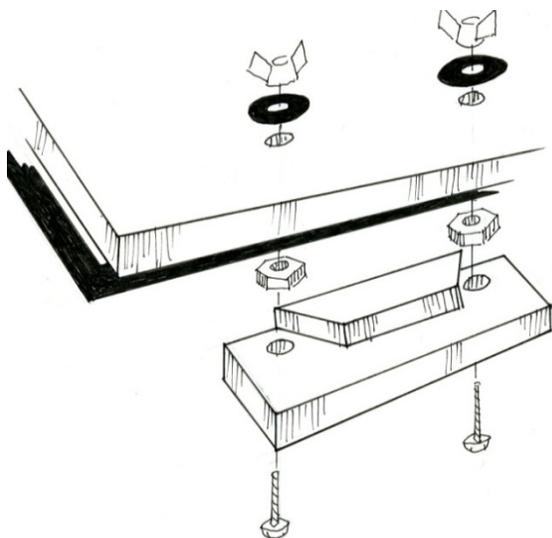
The front clamp is made of a series of Plexiglas pieces that fit over the lip of the drawer. Threaded bolts, nuts, ring gaskets and wing nuts are finger-tightened to apply pressure needed to seal the container.
